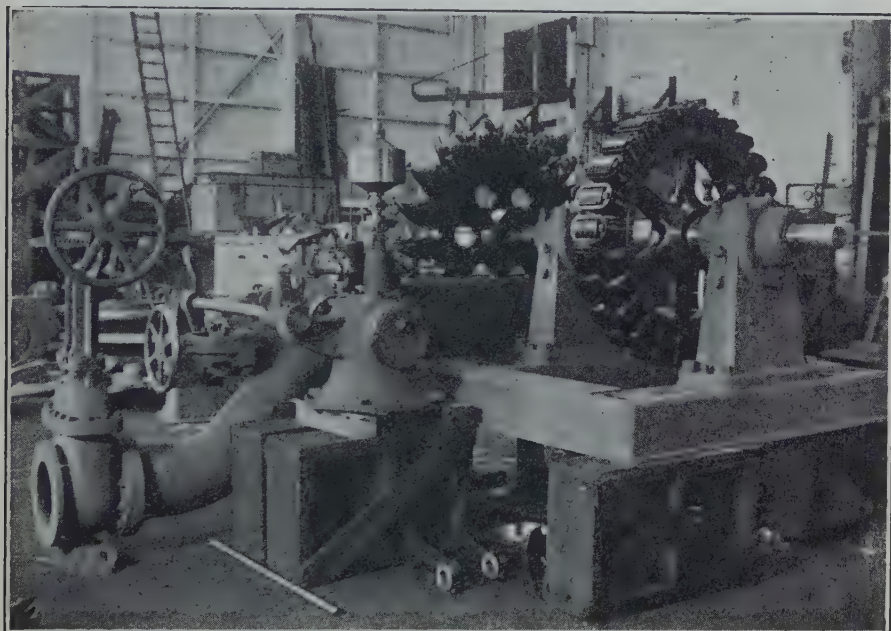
Pelton wheel shop view of single-overhung wheel. (Courtesy of Pelton Water Wheel Company.)
